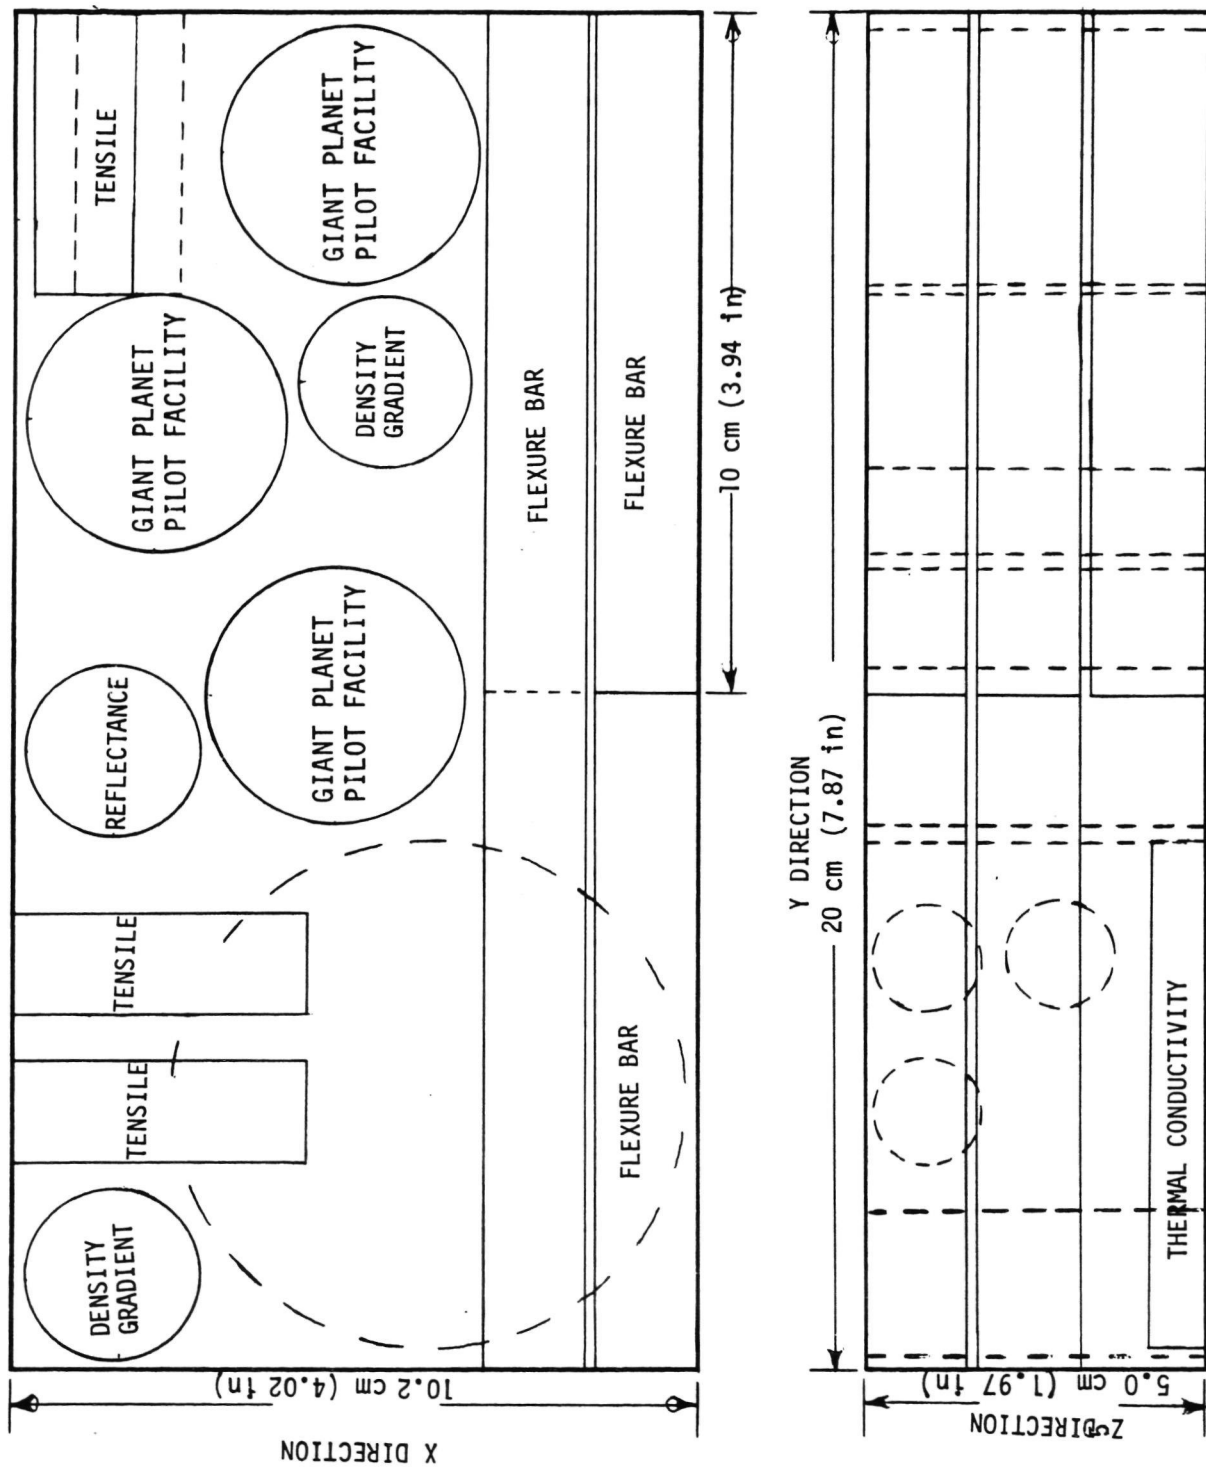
TEST SPECIMEN LAYOUT FOR HYPERPURE SILICA PREFORM
